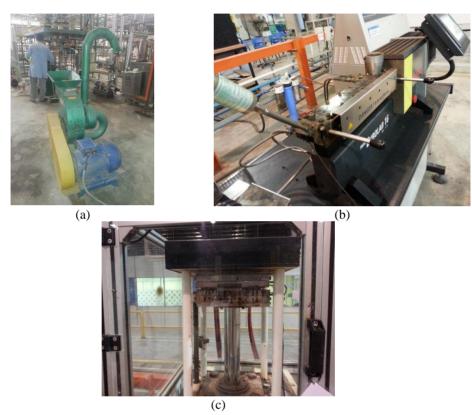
(a) Crushing machine for fibres, (b) Extruder machine for compounding the composites, (c) Hot press machine
